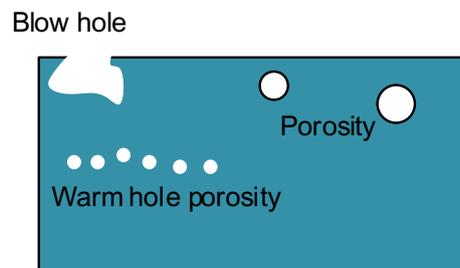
Schematic showing various types of gaseous defect in casting blow holes, porosity, and worm hole porosity.
